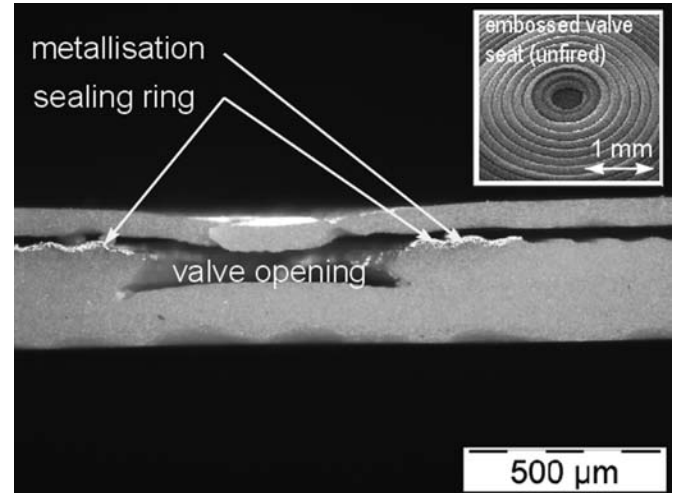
Chamber and embossed sealing seat of a cofired valve assembly.
